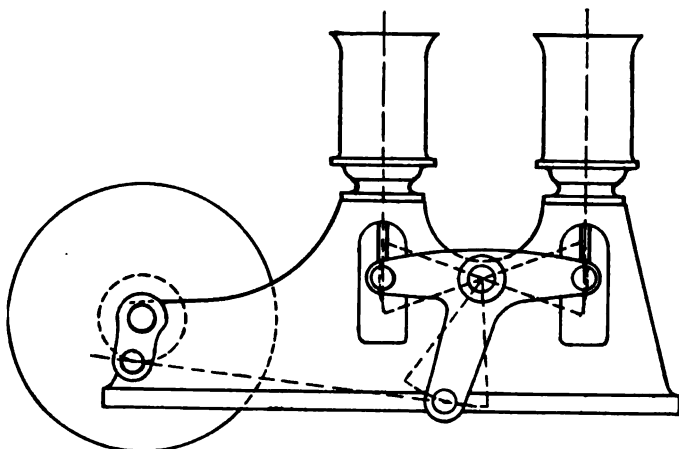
ELEVATION DIAGRAM OF HERCULES MACHINE.
